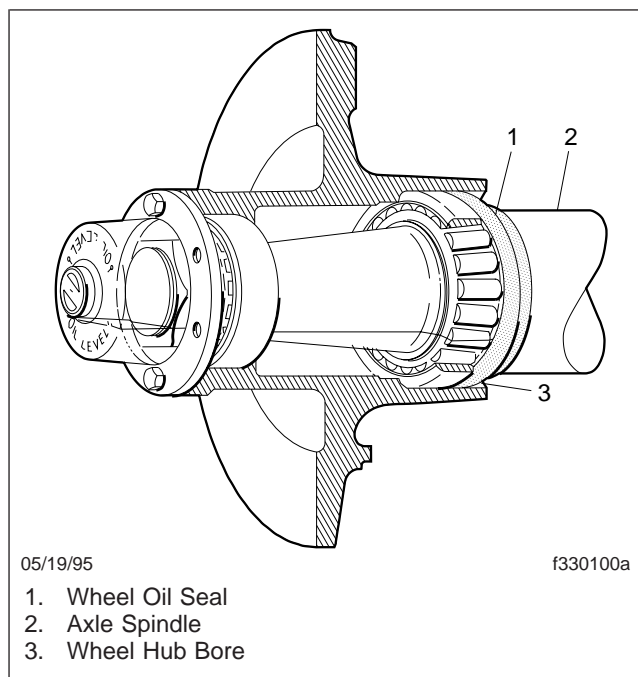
, Spindle-Mounted Wheel Oil Seal (typical)
